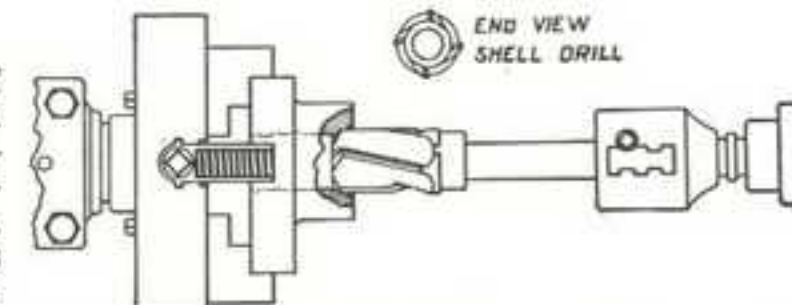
Drilling a Cored Hole with a Four Lip Shell Drill
